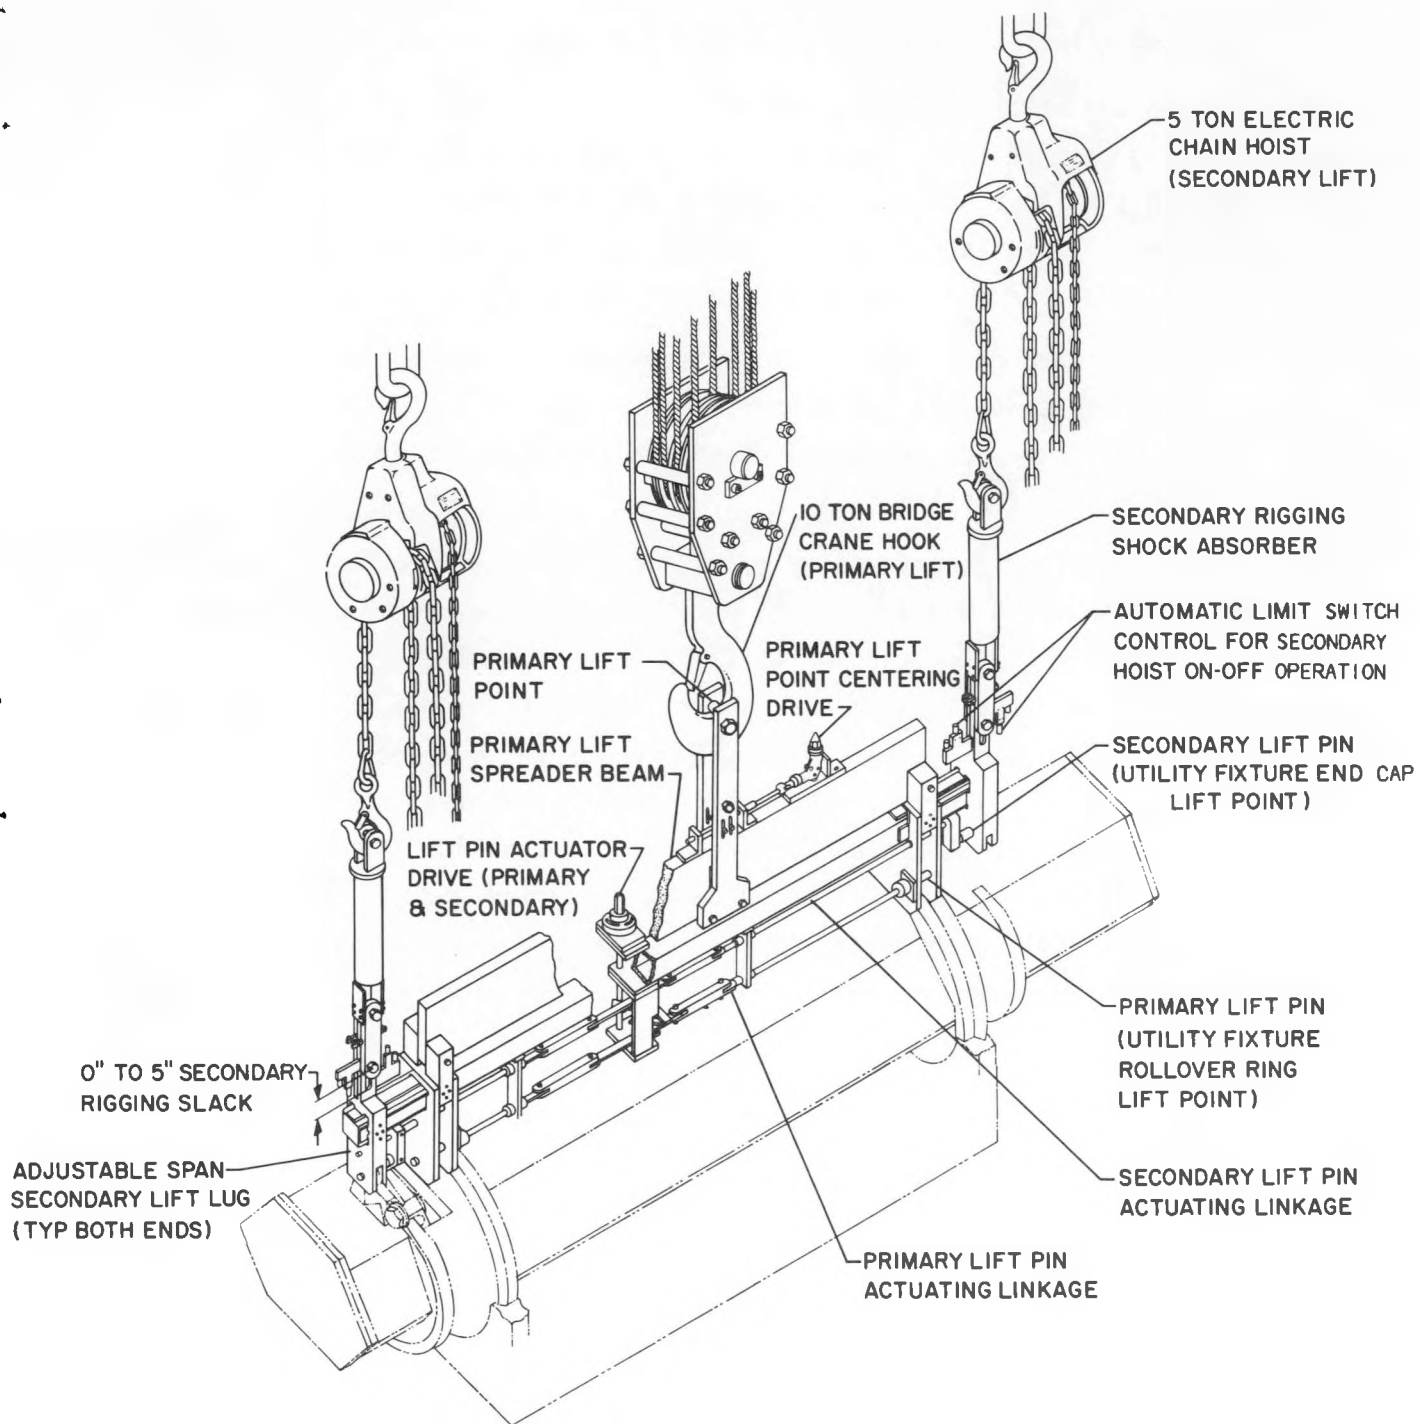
LWBR Utility Fixture Horizontal Grapple Assembly
